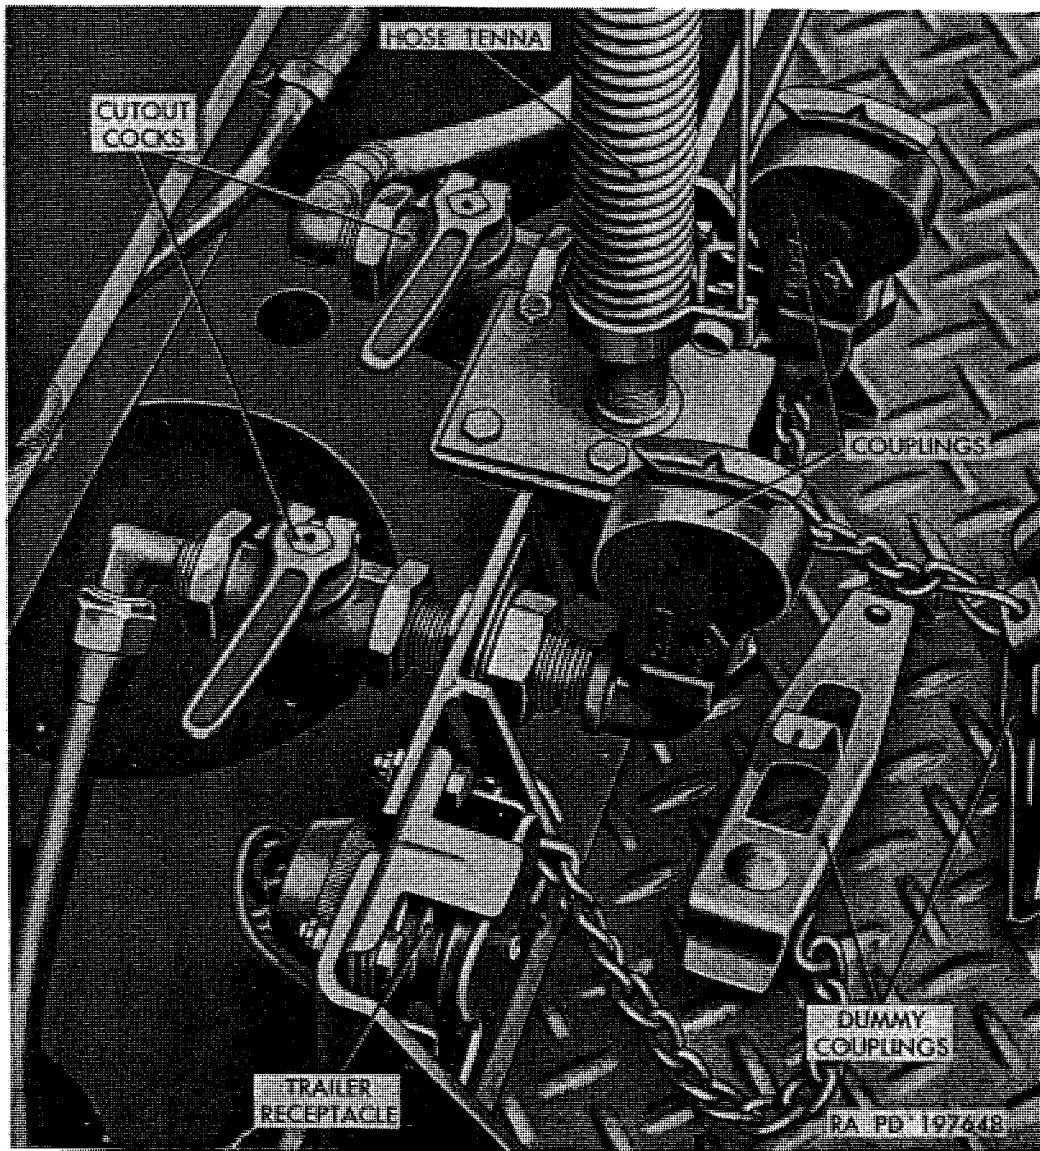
Trailer brake couplings and cutout cocks installed at rear of cab (M221).
